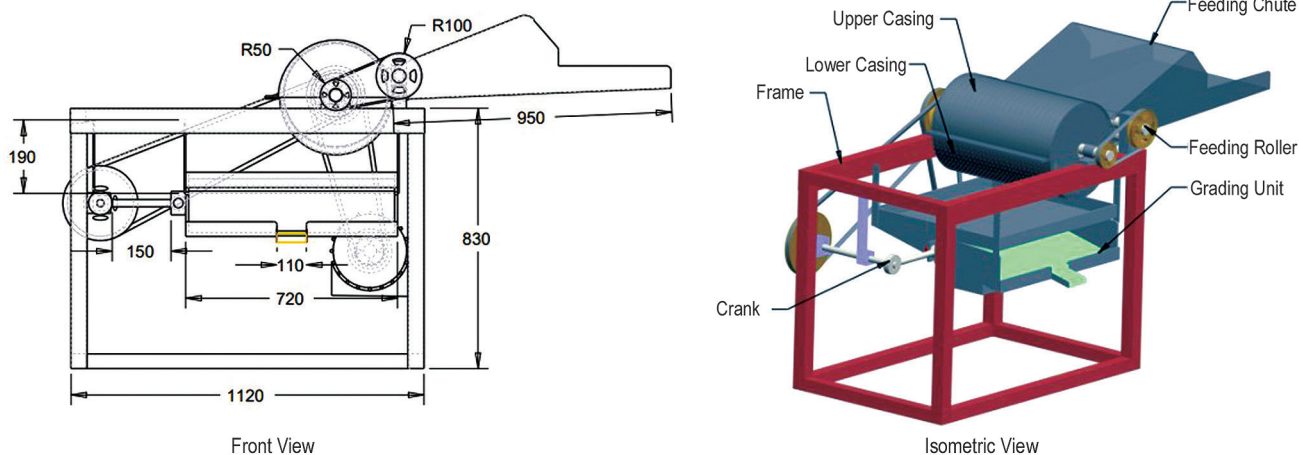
Front and isometric views of the CAD design of defluffing machine.
